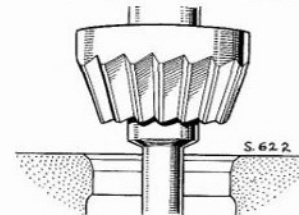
Churchill 75° Valve Seat Cutter Tool
